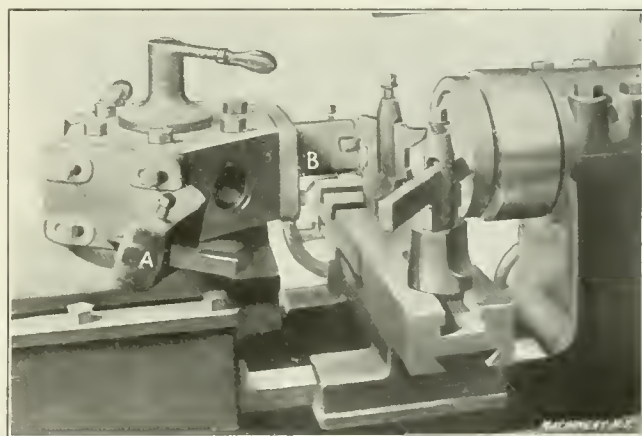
View showing the Tools used in Finishing the Gear Blanks
